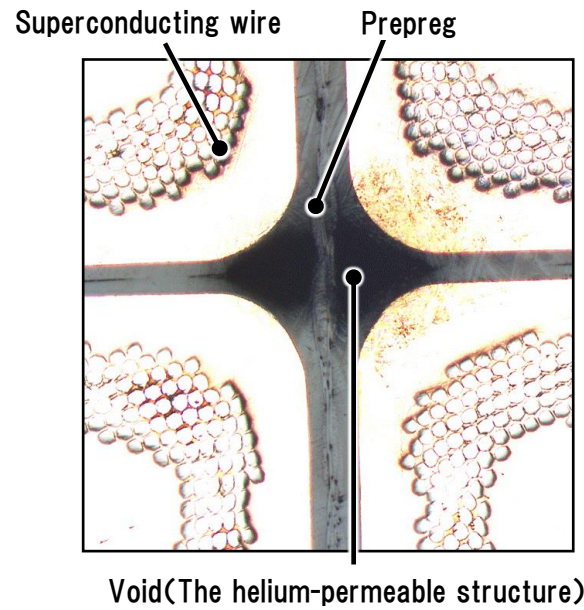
Photo of cross section of a prepreg molding coil, which using rectangle wires with dimensions of 2.2 x 1.7 mm, 0.3 mm radius of the corner
